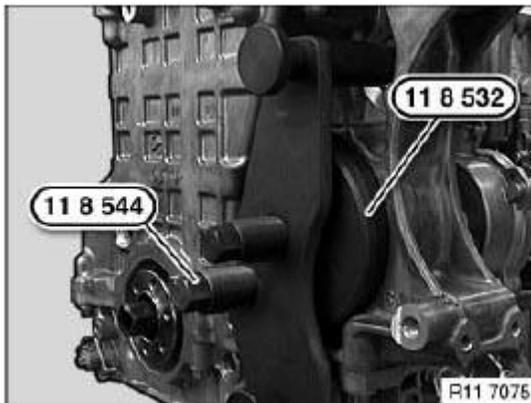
Positioning Special Tool (11 8 532) On Sealing Cover
